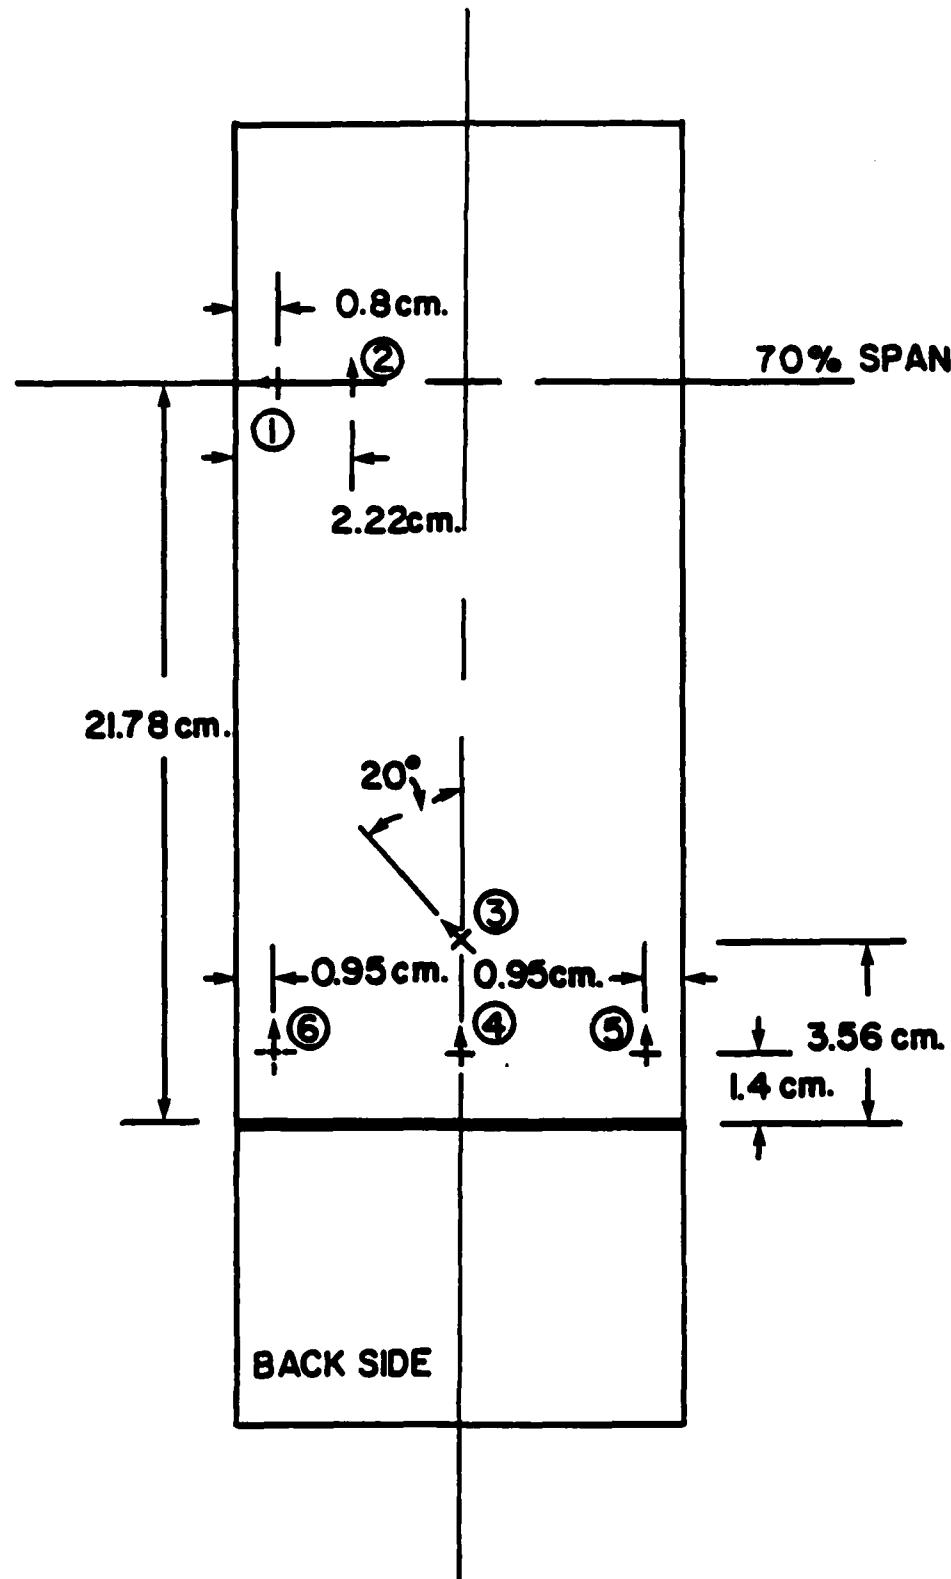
A. Strain Gage Locations for Group 3, 7, 8, and 9 Structural Element Test Specimens.
